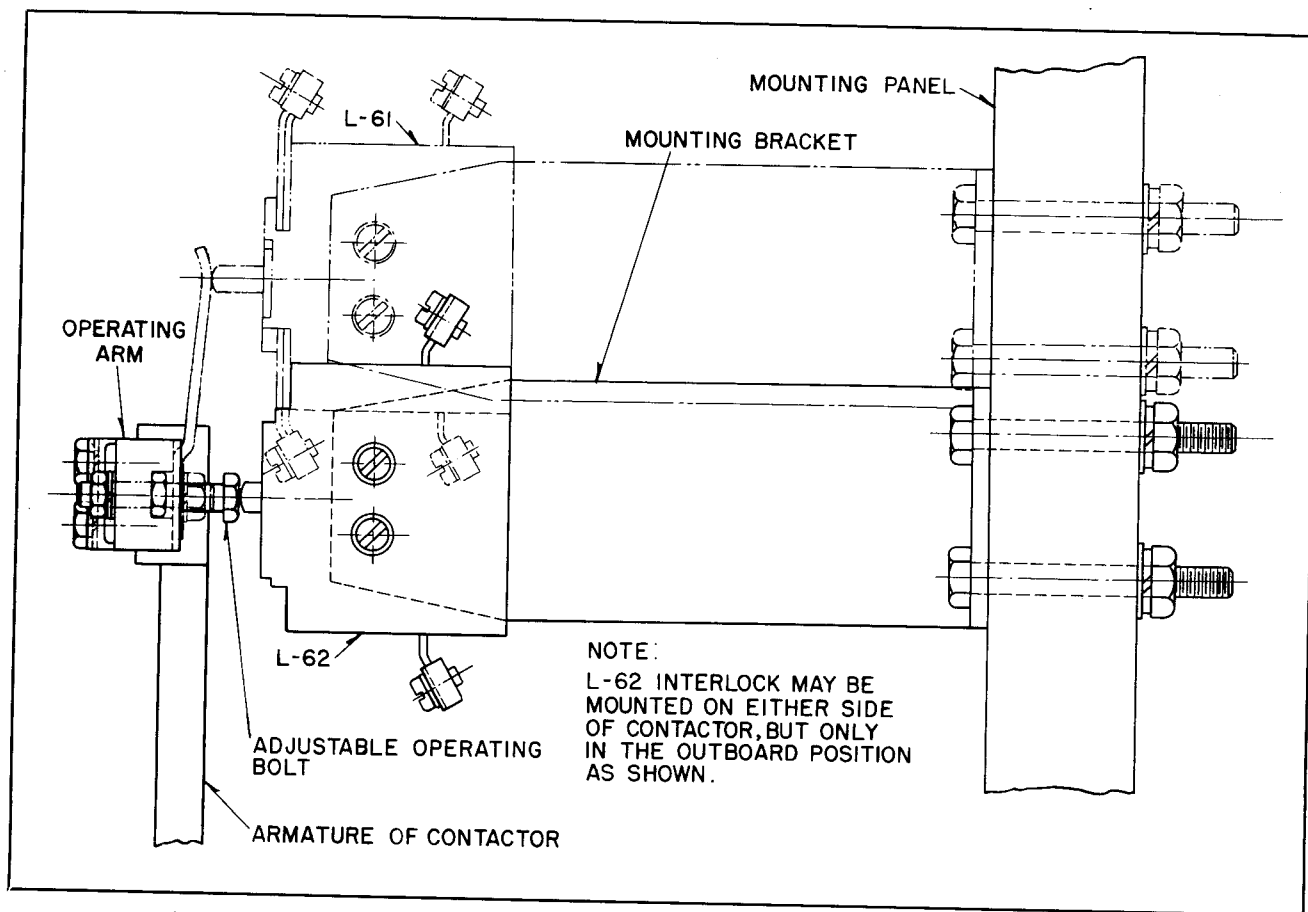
Type L-62 Interlock for Magnet Closed Contactors M-810, M-810-R and M-910
